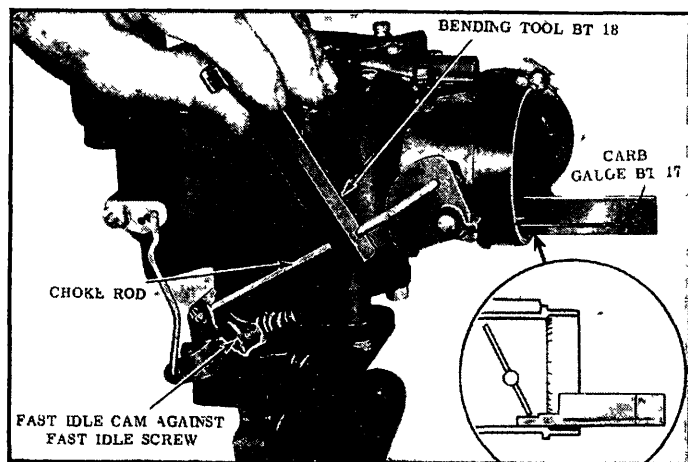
C Choke rod adjustment on Rochester Oldsmobile 1949-50 carburetor
